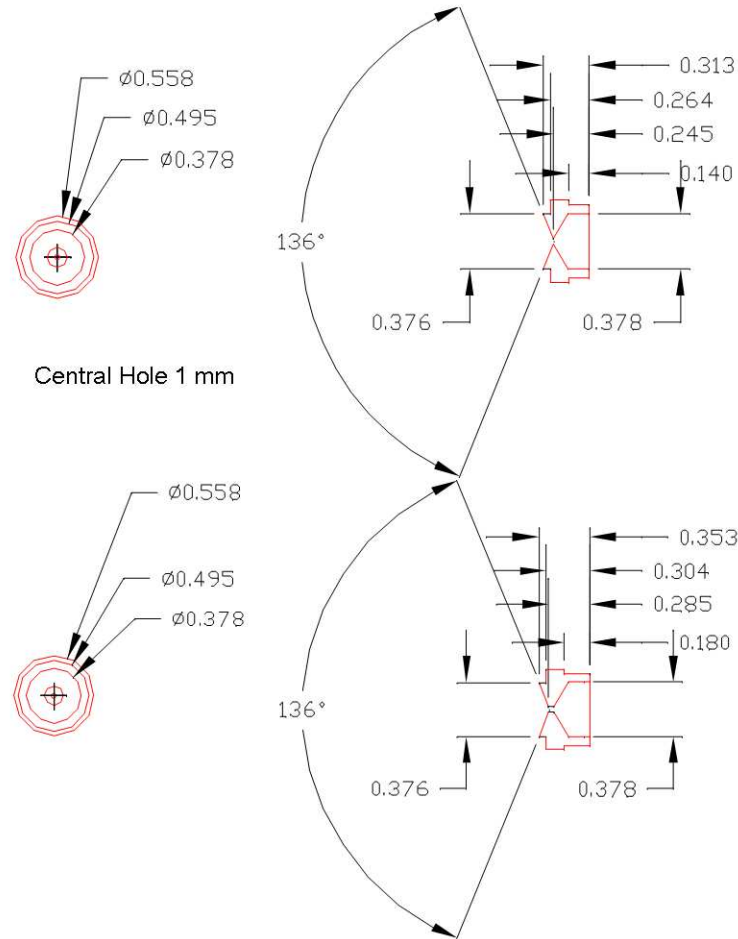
Engineering schematic of the front ferrule, machined from stainless steel.
